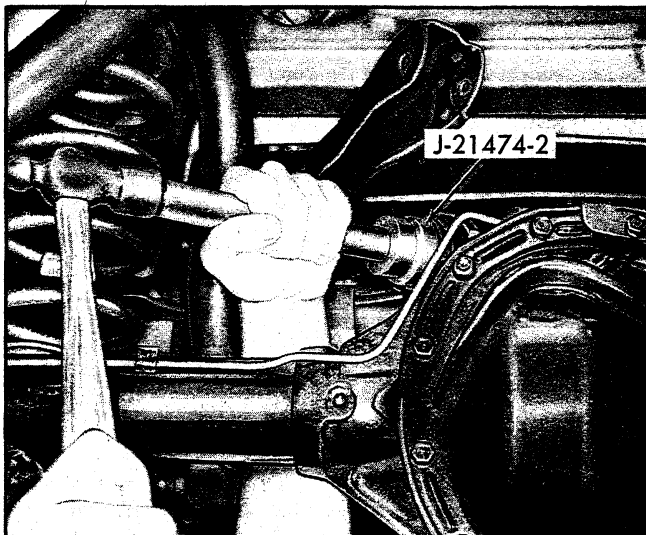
Carrier Mounted Suspension Bushing Installation (Heavy-Duty) (Chevelle)
